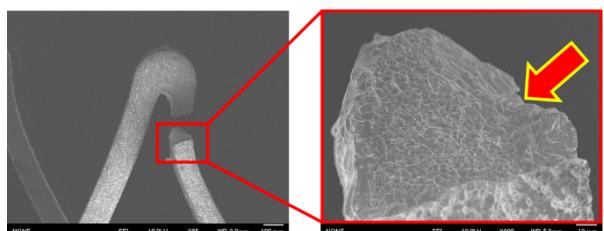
Fatigue fracture surface of TiNi SMA stent
